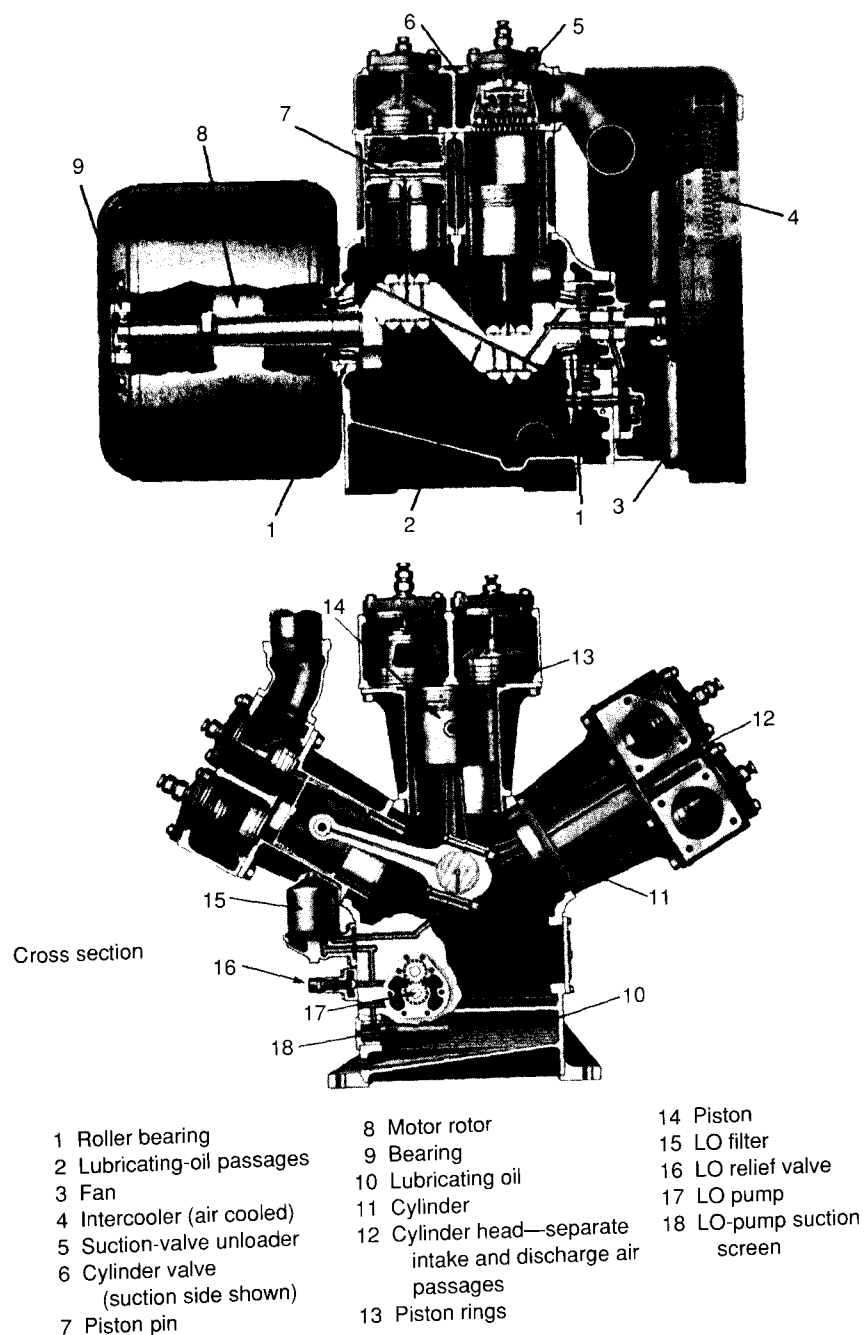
Two-stage six-cylinder W-type reciprocating compressor. Courtesy Dresser-Rand.
